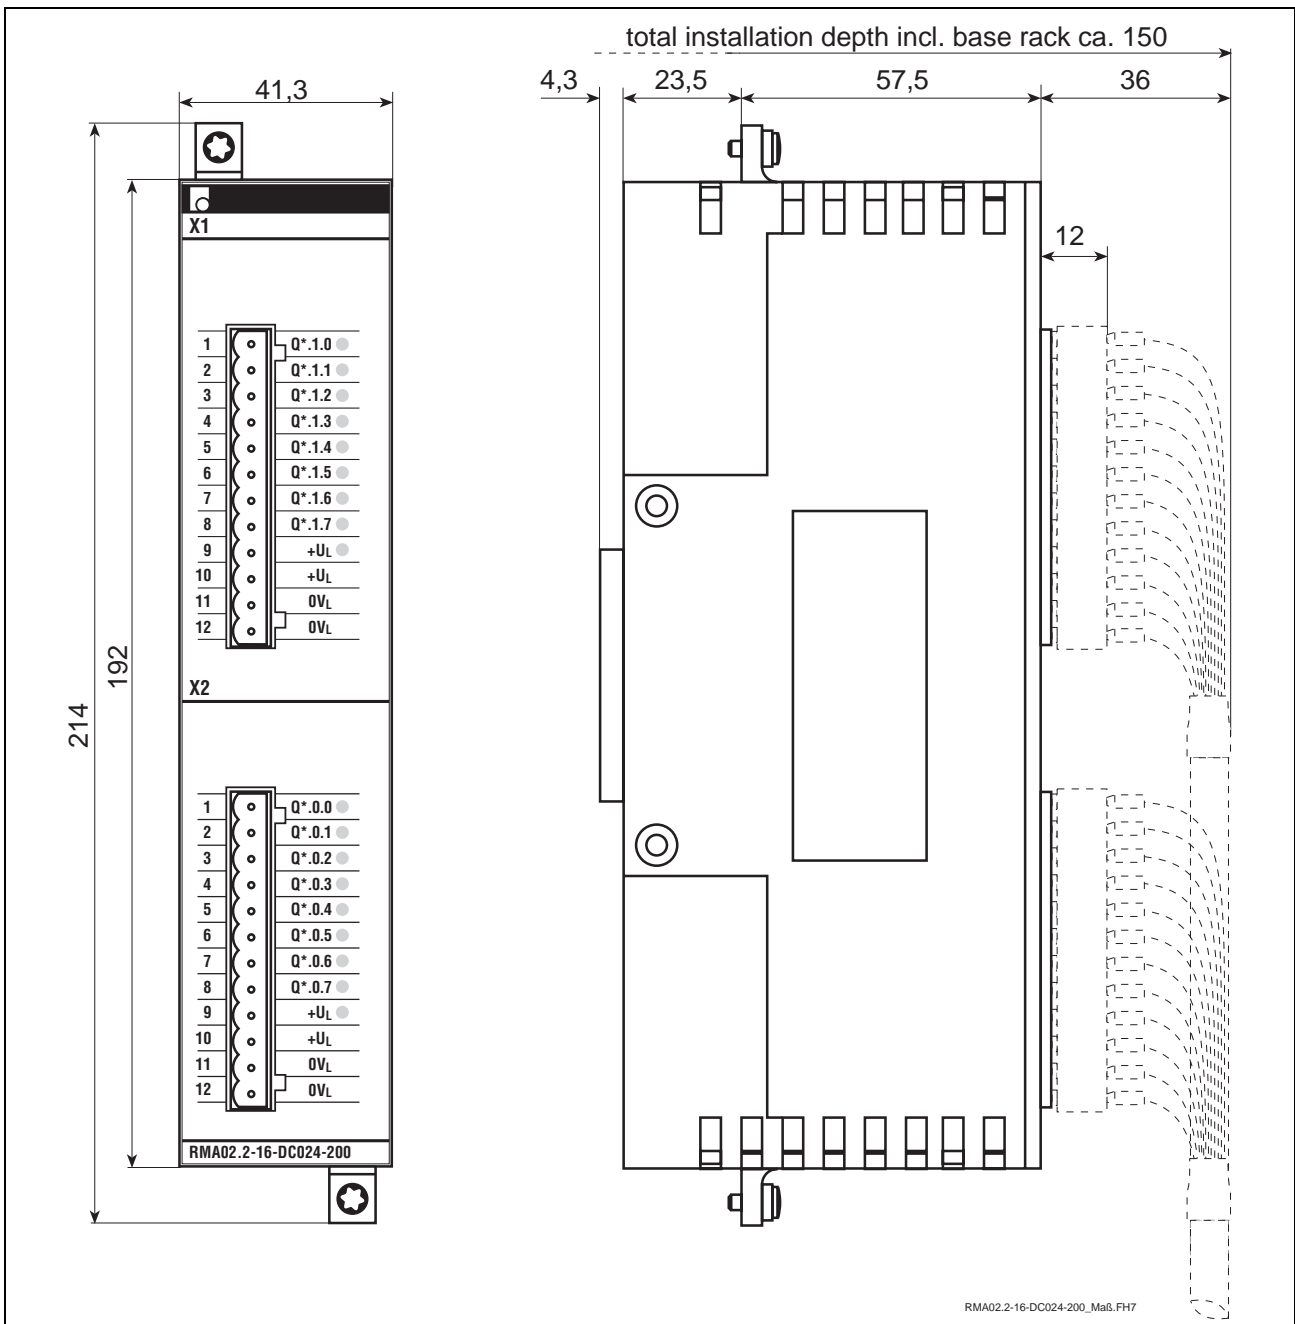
Mounting dimensions of RMA02.2-16-DC024-200
